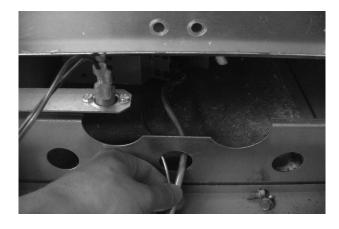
Install Burner Door and Tubes (3 Section Shown)
